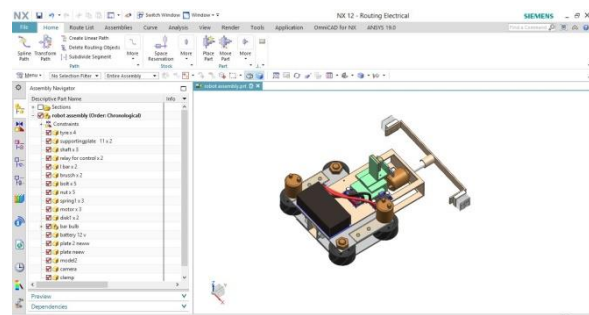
Modeling of pipe inspection robot in NX CAD
